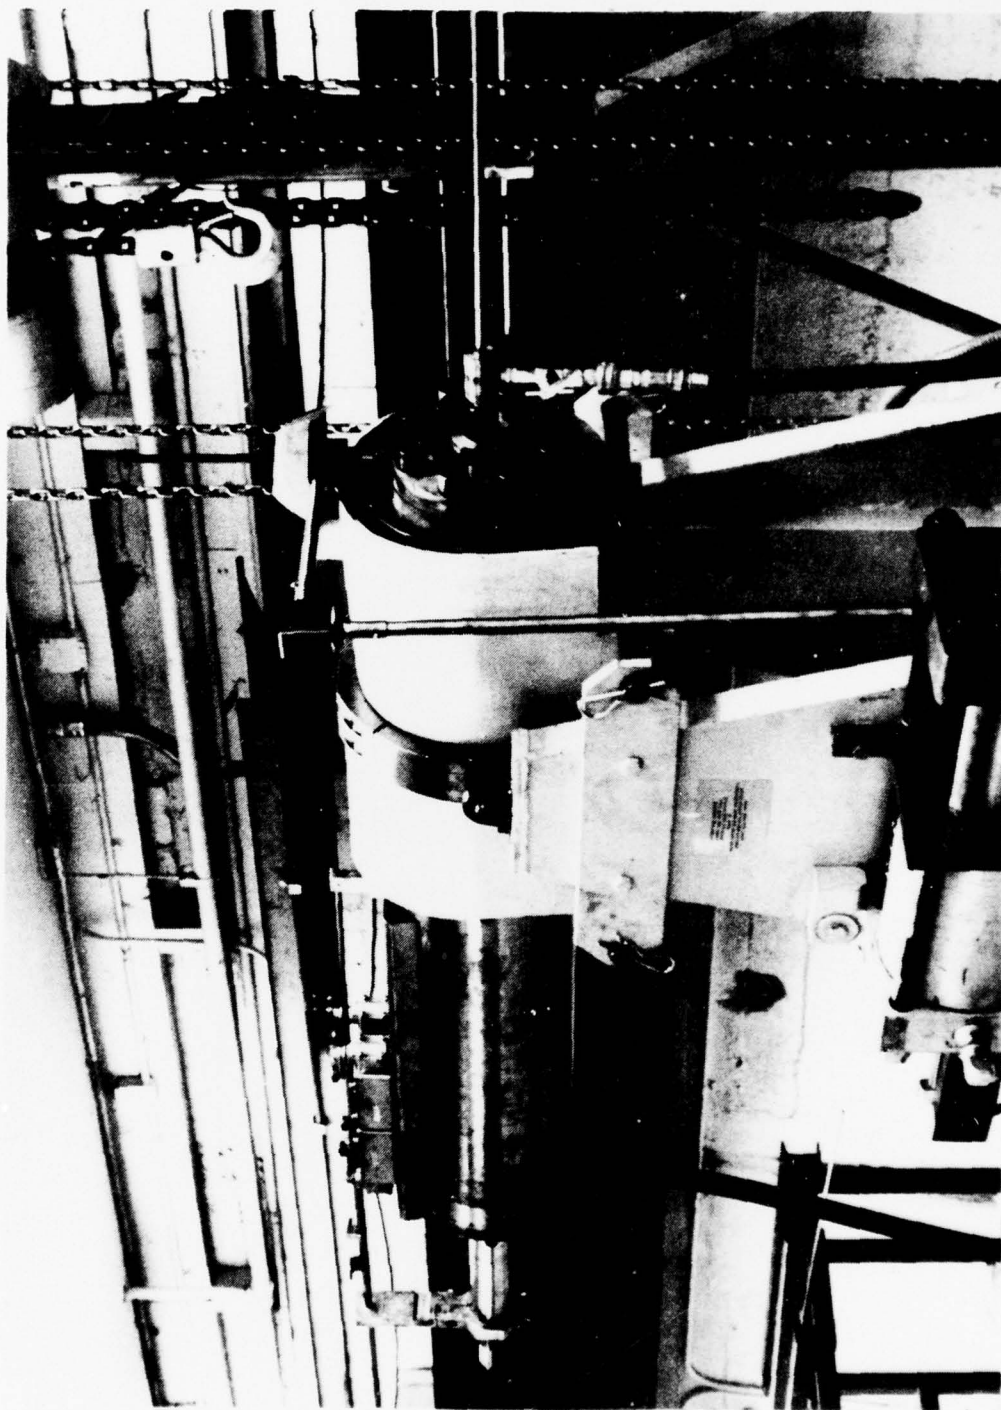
Side view of hydrostatic extrusion machine with cooling system attached.
